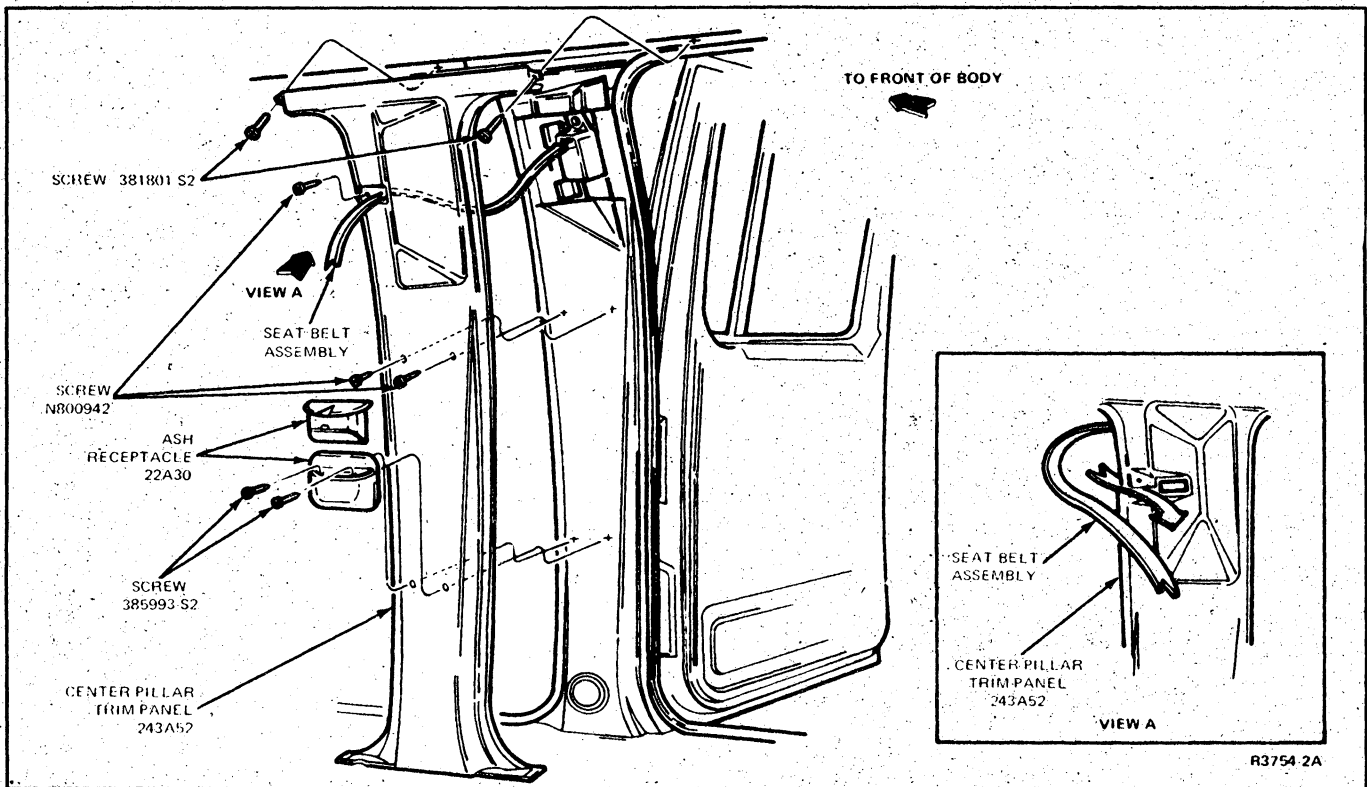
F-350 Crew Cab Center Pillar Trim Panel
